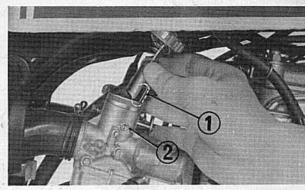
(1) Throttle valve groove (2) Concave part
